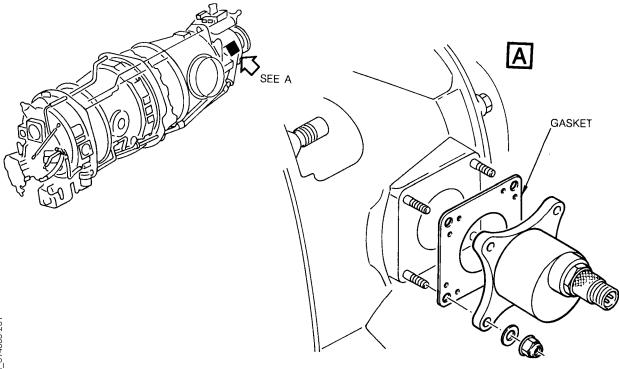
Propeller Tachometer Generator - Removal and Installation
